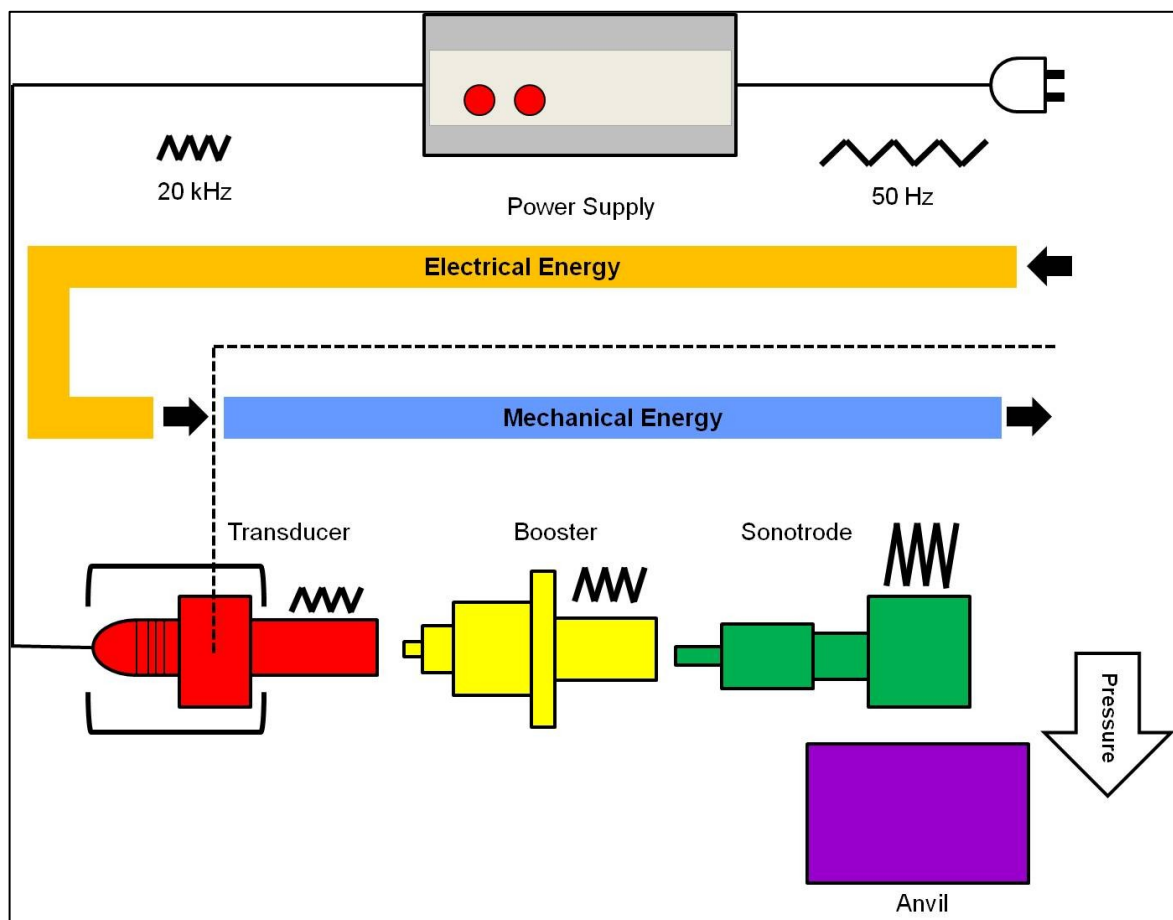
Schematic of the components of an ultrasonic welding system
